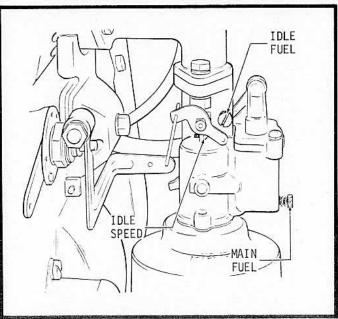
UPDRAFT GASOLINE CARBURETOR
